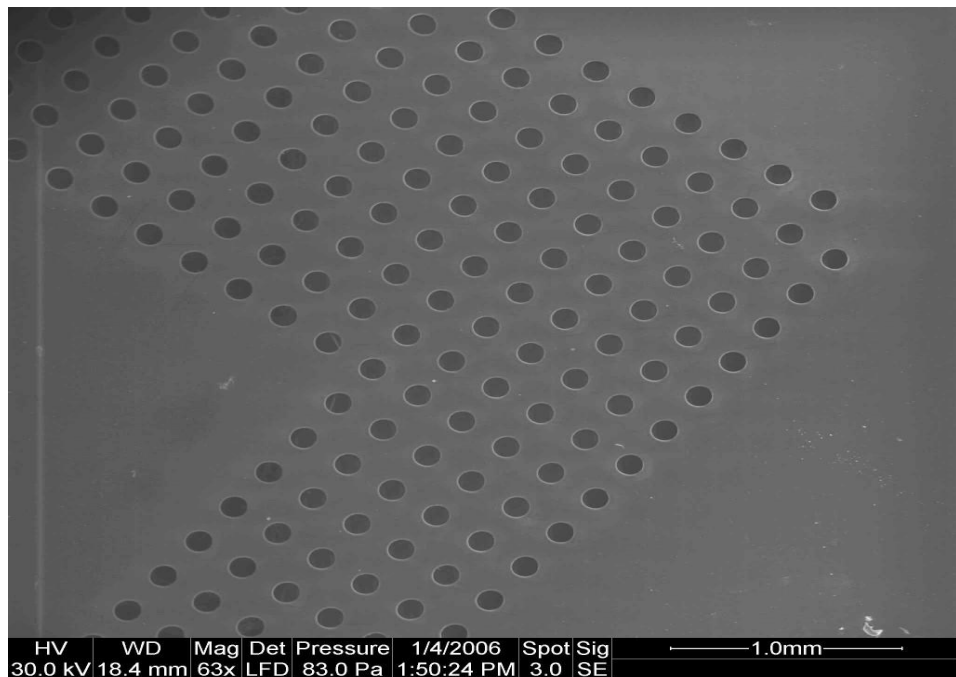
Micro holes laser machined in polyimide using a UV laser (Potomac Photonics).
